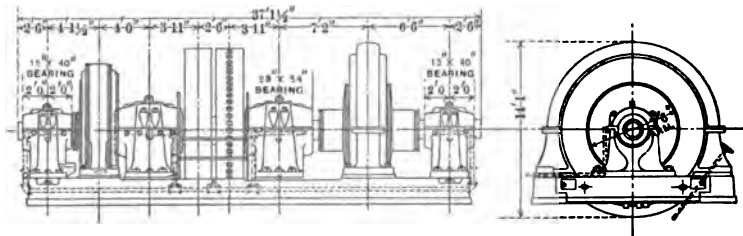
OUTLINE OF FLYWHEEL MOTOR-GENERATOR SET SUPPLYING POWER TO ROLL MOTORS.
